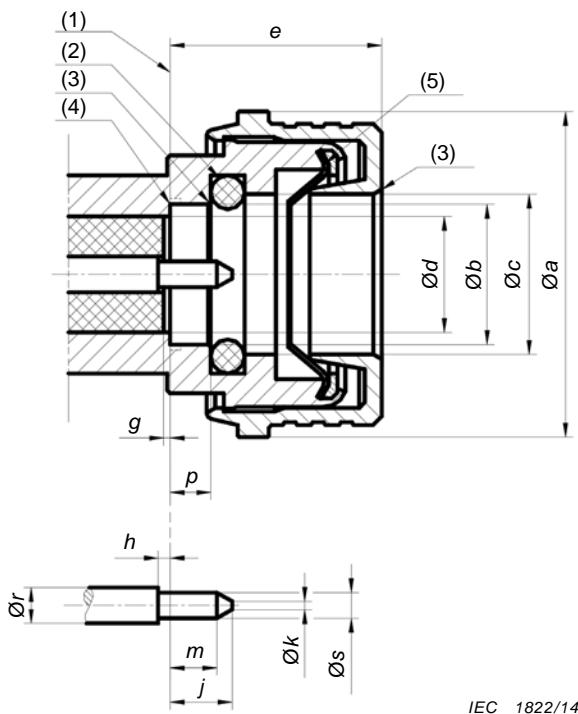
Connector with pin-centre contact (for dimensions and key, see Table 1)
